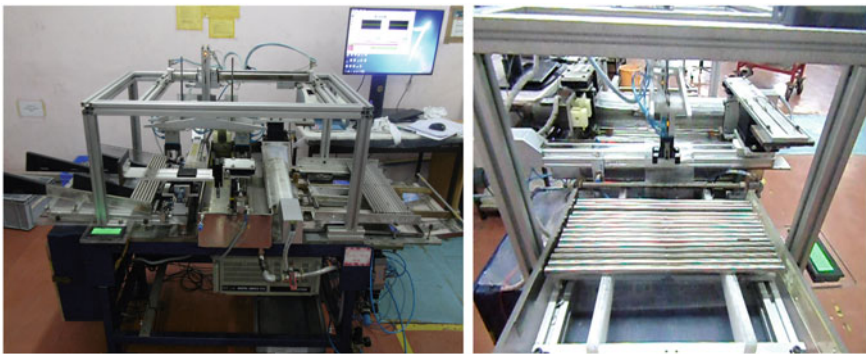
Automated ultrasonic inspection system for end cap weld joints
